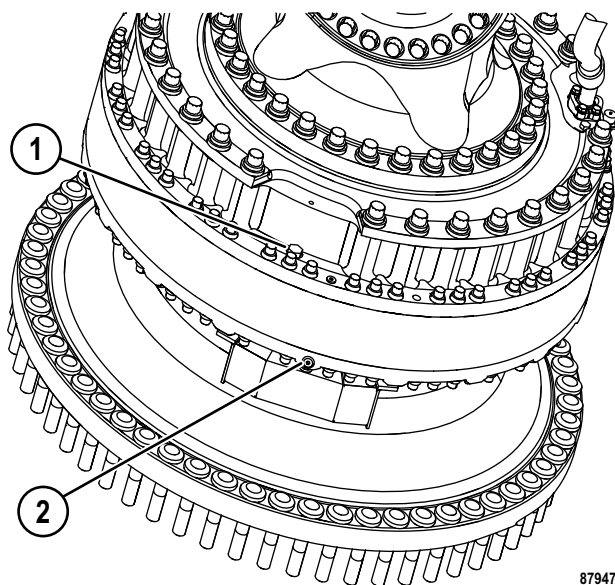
FRONT BRAKE DRAIN PLUGS
